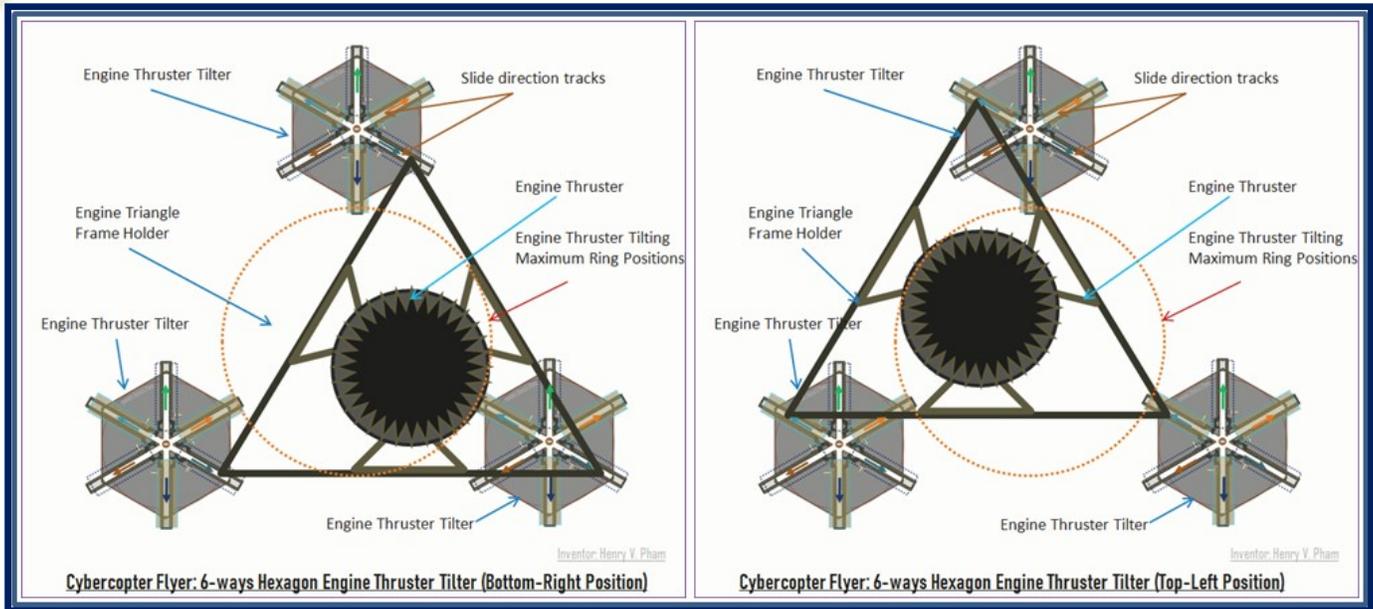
Cybercopter Flyer Hexagon Engines Tilter Mechanism Operating View 3
